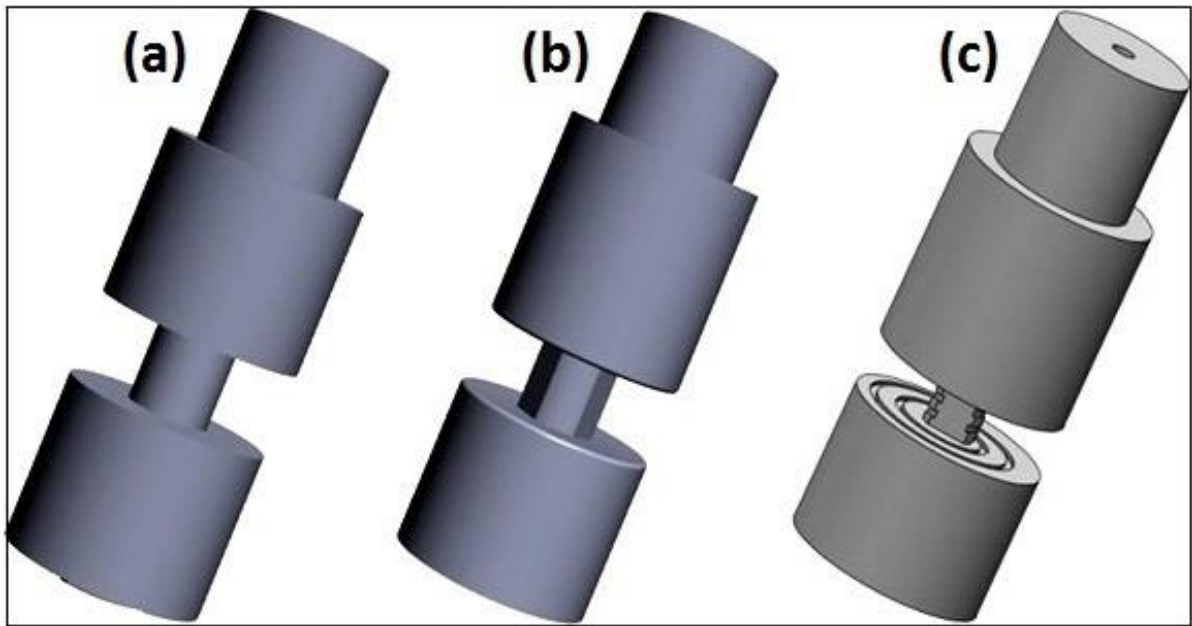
9. 3D model of the bobbin-tool designs, utilising for the BFSW welding process by the CNC milling machine; (a) simple bobbin-tool, (b) triflat bobbin tool (non-threaded), (c) fully-features triflat bobbin tool (threaded and scrolled). (by A TAMADON).
